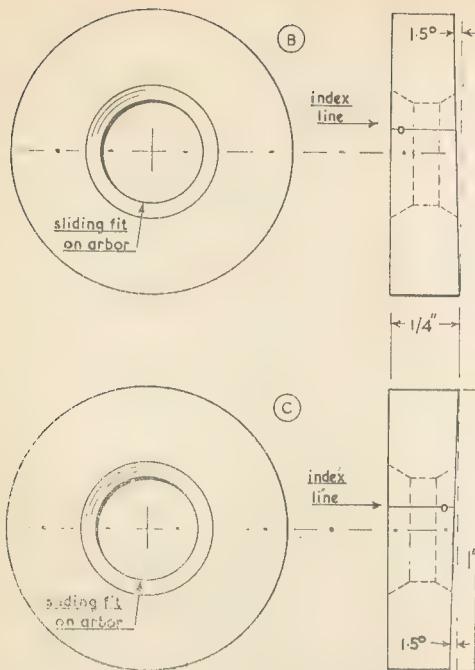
The two inner collars (b) and (c); Fig. 13: The engraving tool used; Fig. 16: Method of calculating the width of slot machined with the wobble saw
